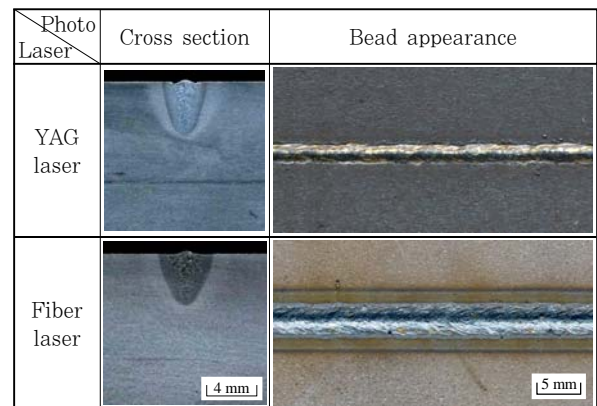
Bead appearance and cross section in welding of Nd:YAG laser and fiber laser
